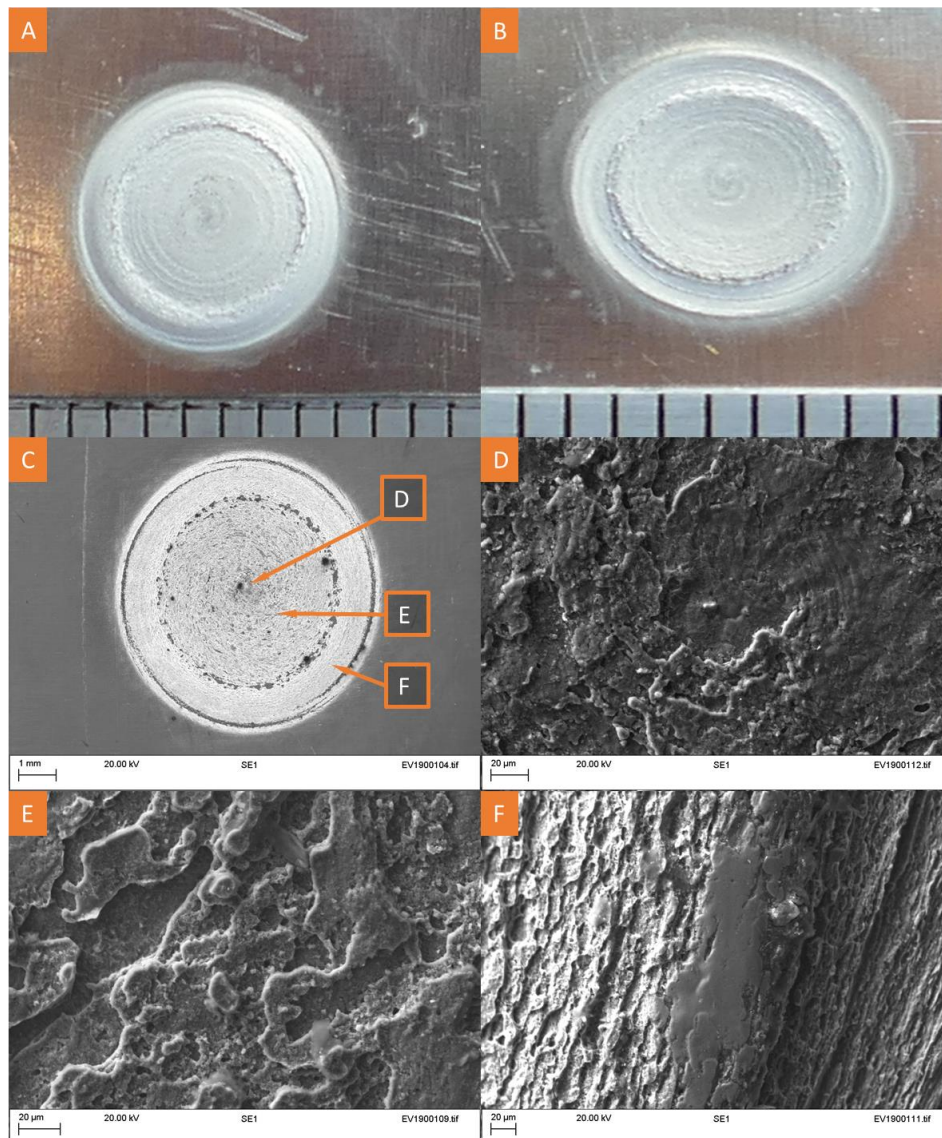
Fracture surfaces of a through interface failure mode of RFSSW AA5754-H24 condition W16 (RS = 2160 rev/min; PD = 1.8 mm):
